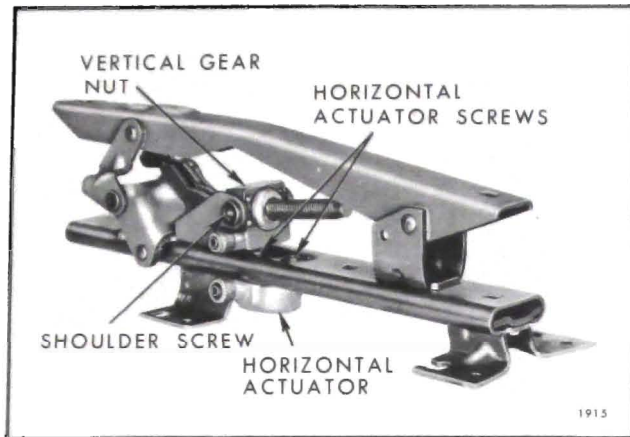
Four-Way Seat Adjuster - "A" Styles
